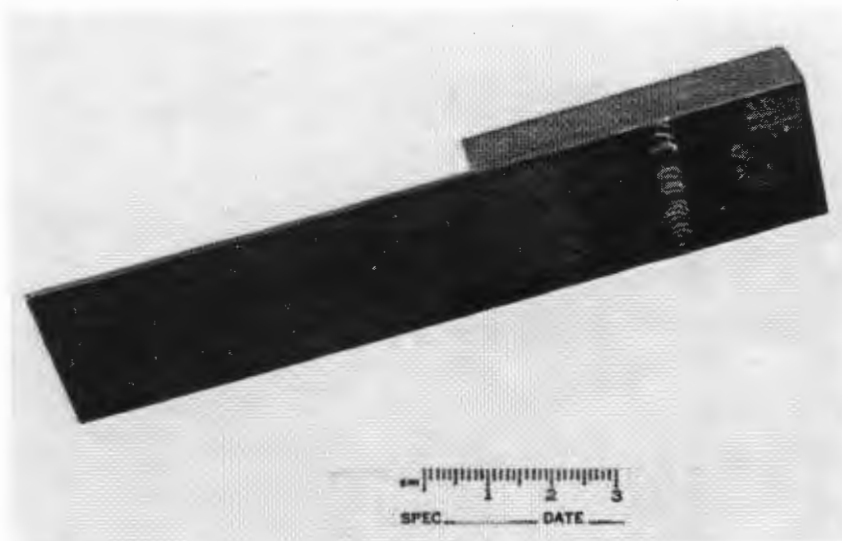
Representative fillet weld specimen in the as-received condition; reduced 25%.
